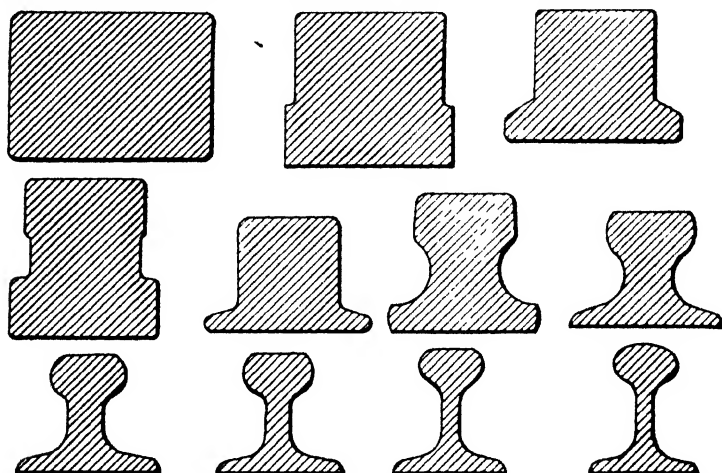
Sections of successive shapes and sizes of "pieces" from bloom to finished rail.
